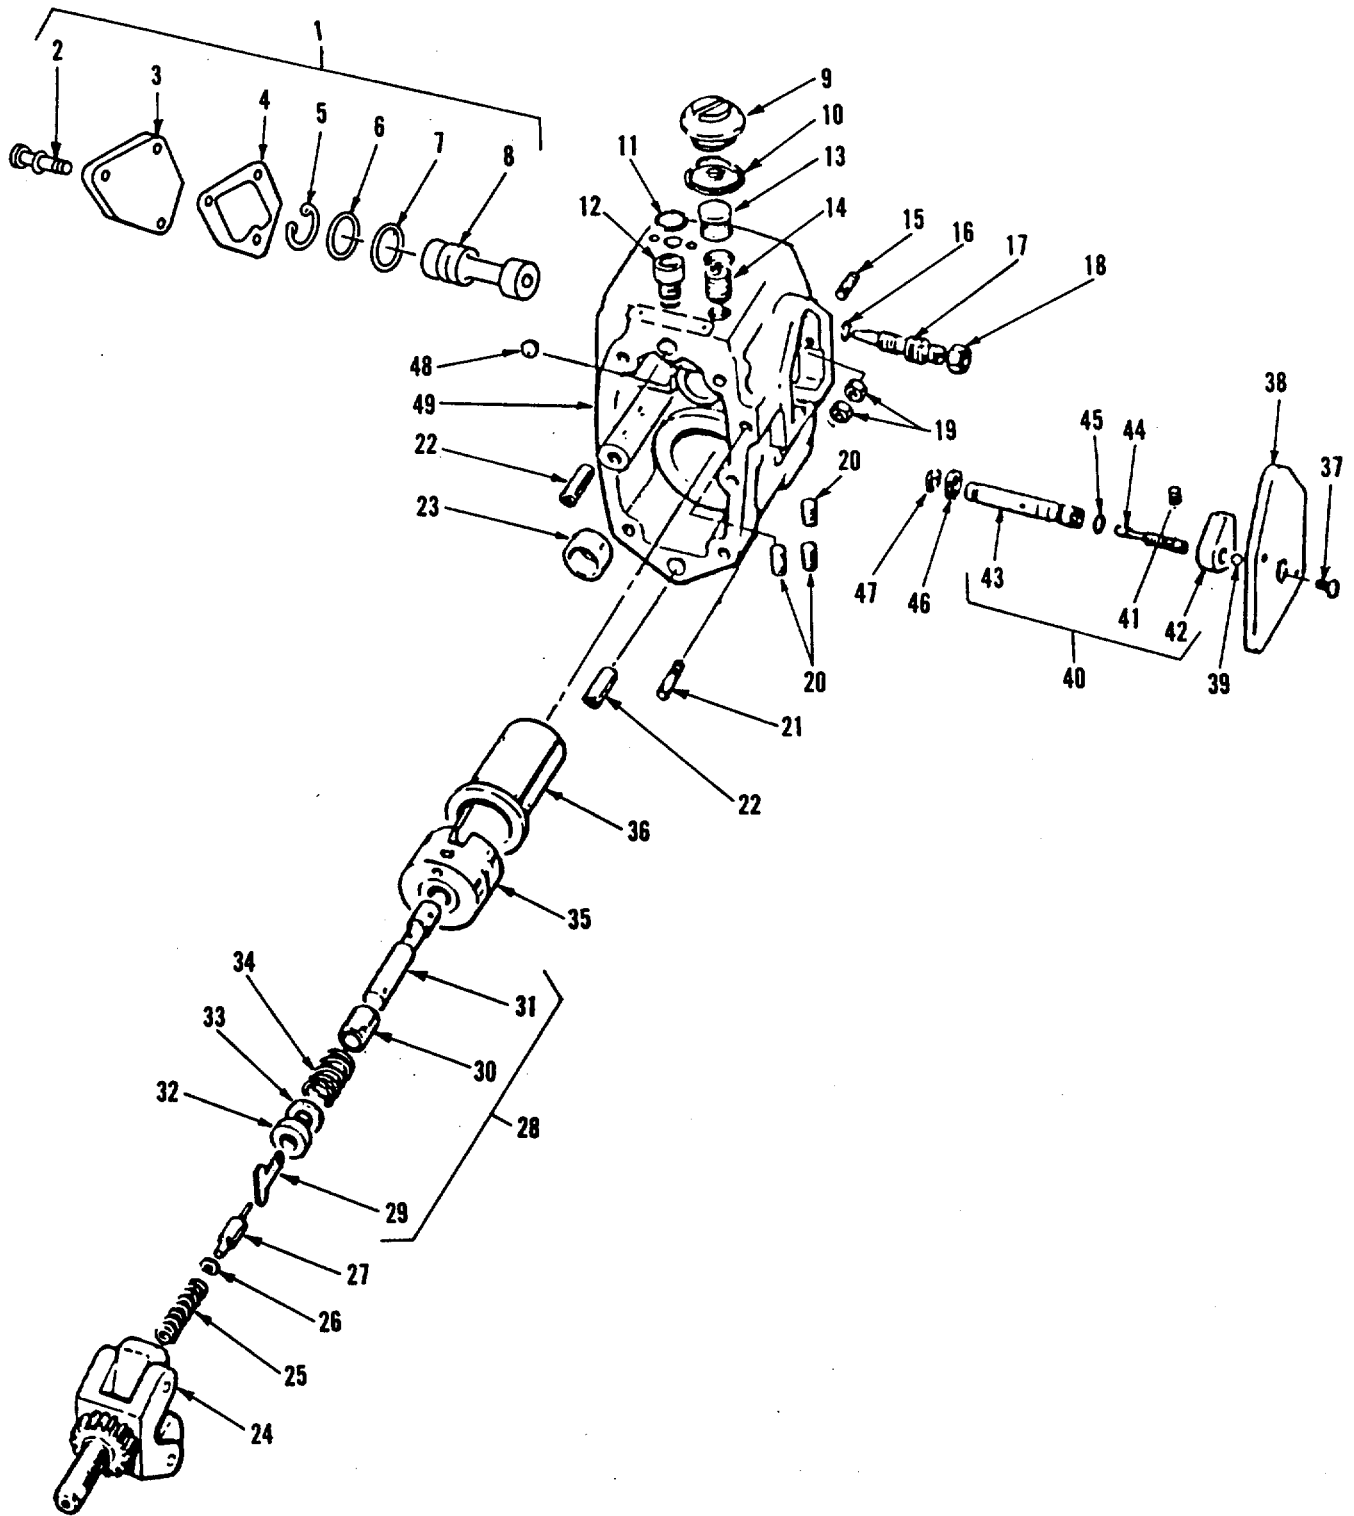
Fuel Injection Pump, Exploded View, Code B
